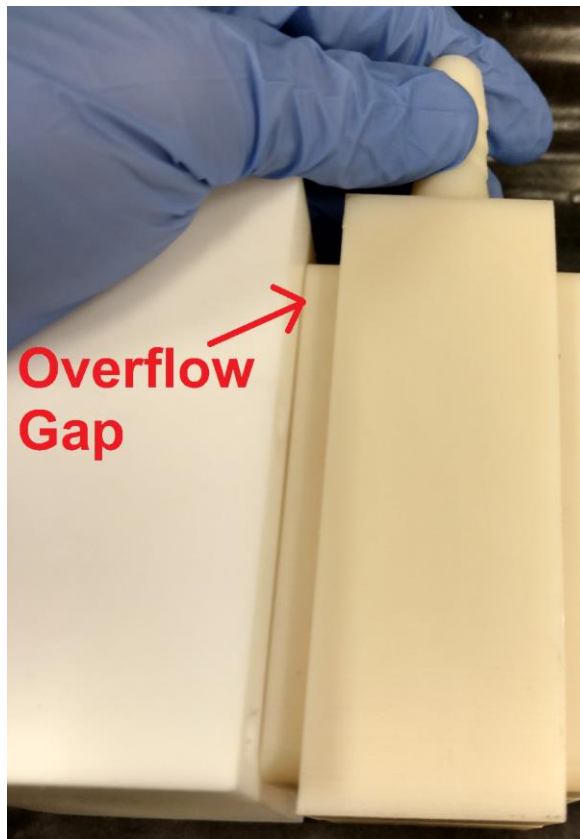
A PAD housing inserted into a potting mold with the overflow gap labeled.
